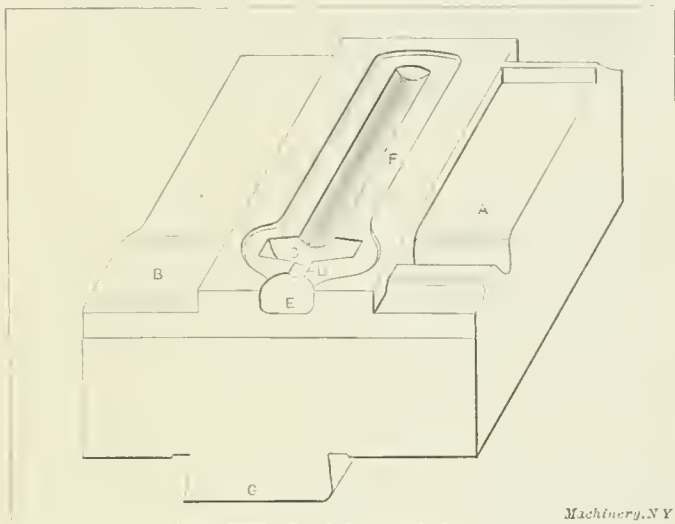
The Lower Die of a Pair of Drop-forging Dies
